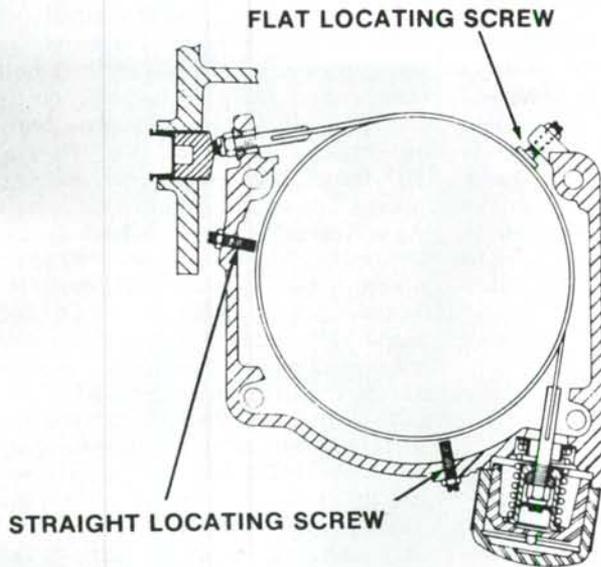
View of front planetary brake band and housing showing correct position of the three locating screws.
